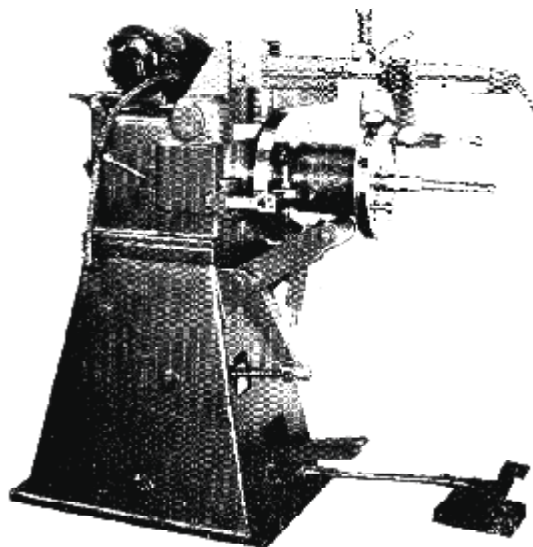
Typical Machine for Checking Coupling-Thread Alignment
